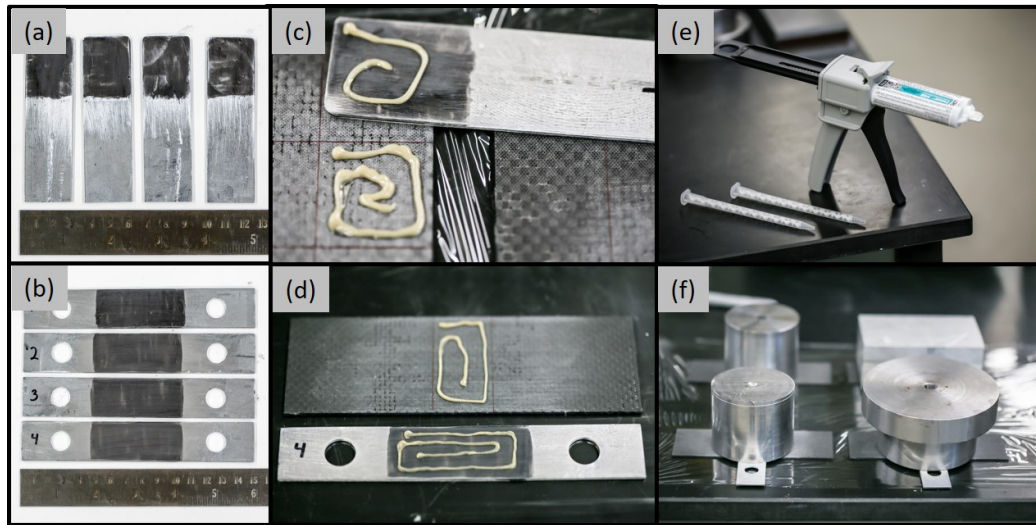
Adhesive joint assembly process. (a) Prepared aluminum tensile specimen parts, (b) prepared aluminum cross tensile specimen parts, (c) Glueing a tensile specimen, (d) Glueing a cross tensile specimen, (e) two part adhesive applicator gun with mixing tips, (f) Clamping with weights.
